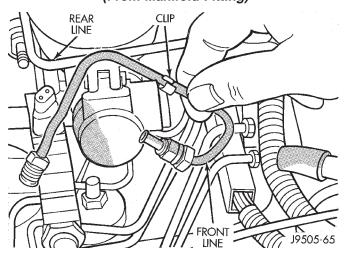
Master Cylinder Front Brakeline Removal/ Installation
